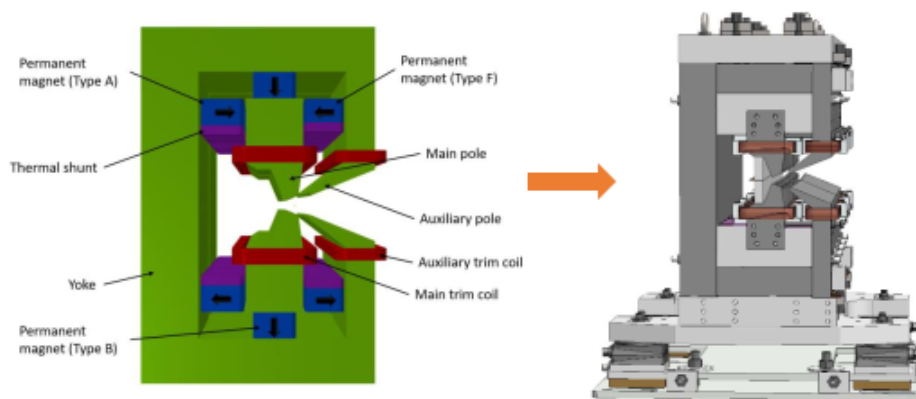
Magnetic design (left) and mechanical design (right) of the HEPTO prototype.
